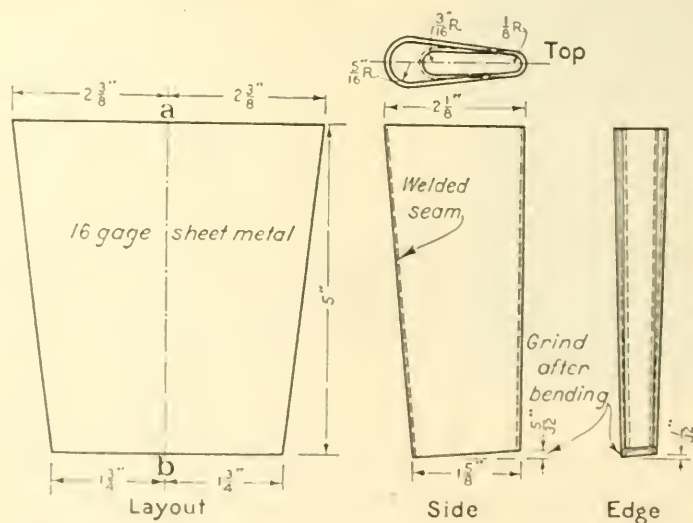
Drawings for the shank, low-cutting hand knife
